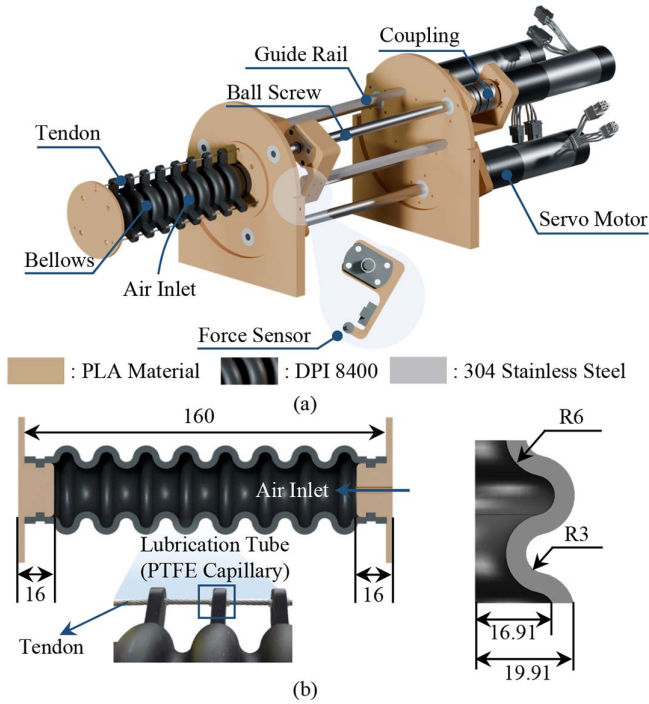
Design and fabrication of the bellows-shaped soft actuator. (a) Mechanical structure. (b) Design parameters (unit: mm).
